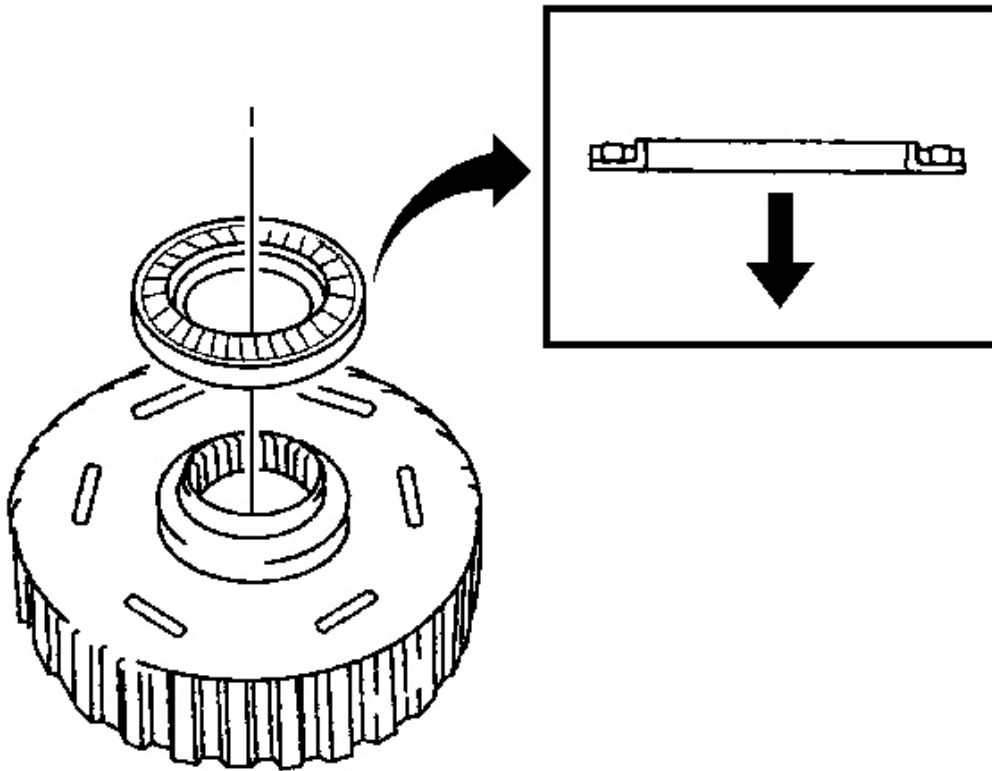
Thrust Needle Roller Bearing & Forward Clutch Hub
